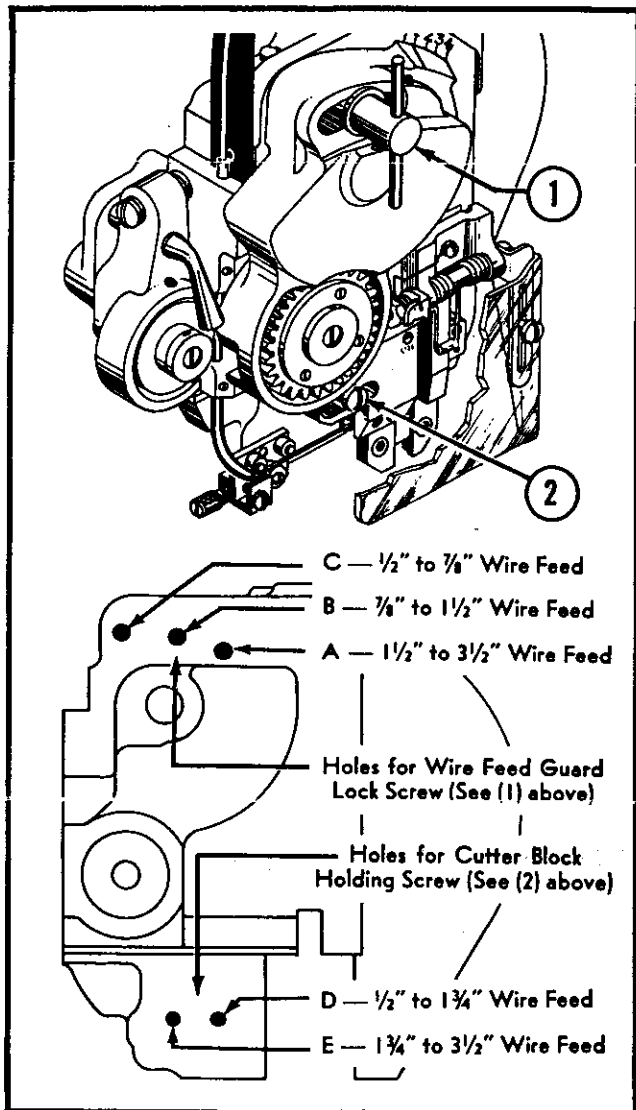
Positioning Wire Feed Lock Screw and Cutter Block Holding Screw
